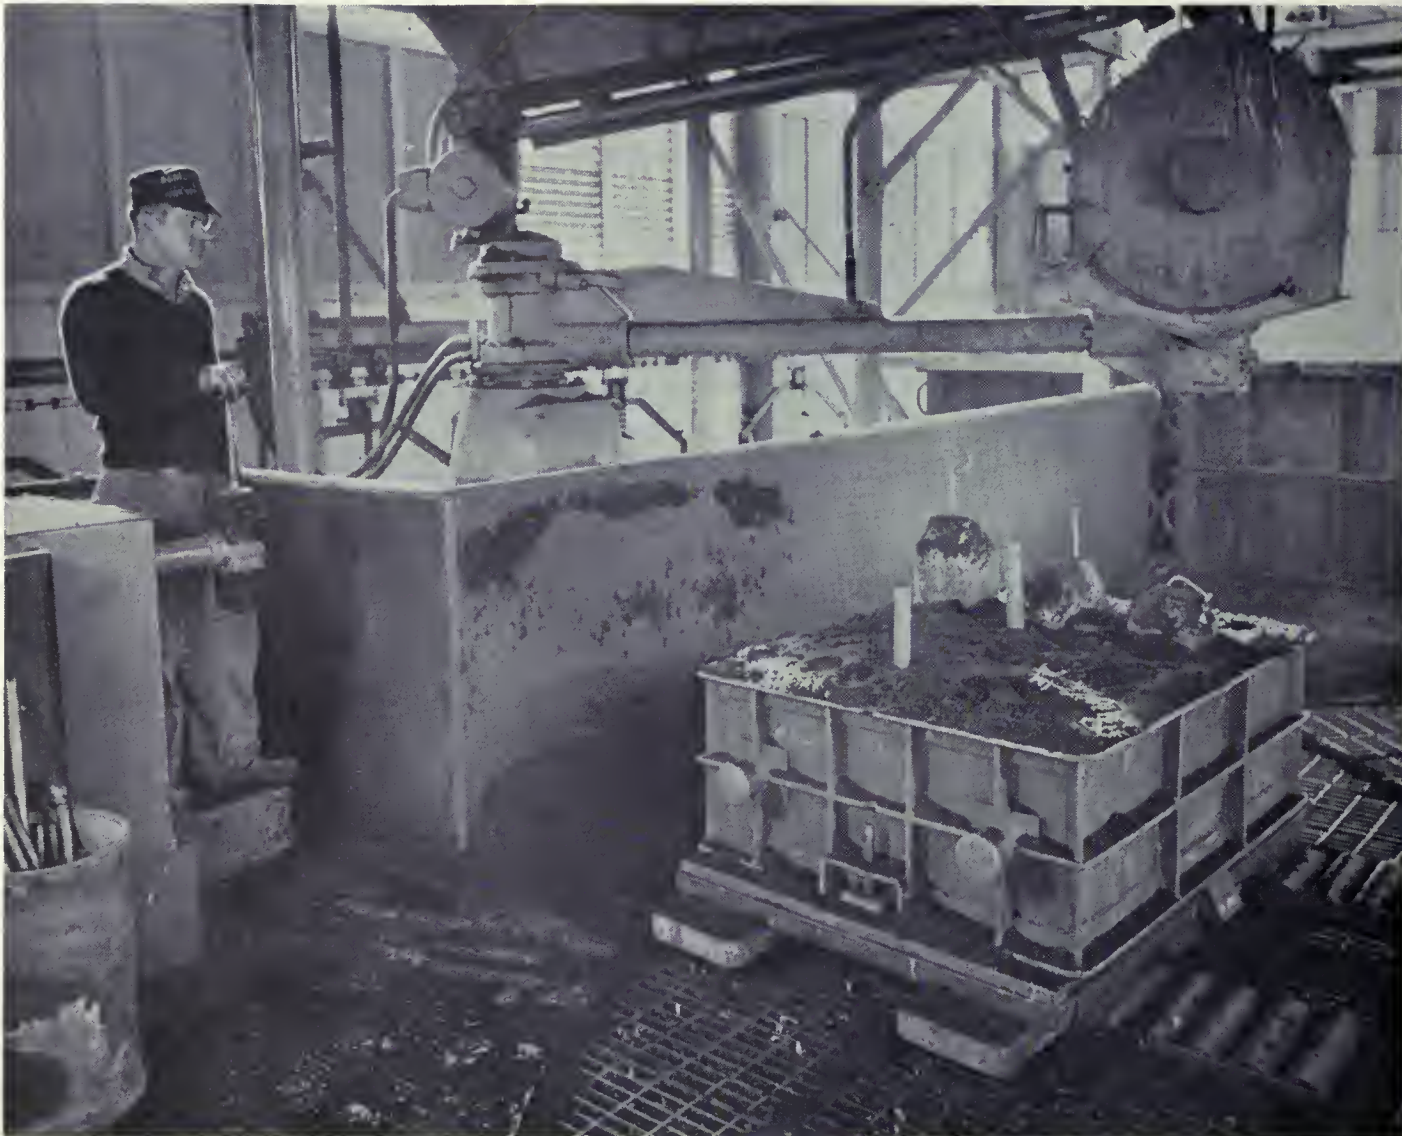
A. Preparing a light sand mold on a molding turntable at the General Metals Corporation Oakland foundry. Operator controls position of the delivery head (right) of the sand-slinging machine as it distributes and rams sand in the mold. (Photo courtesy of General Metals Corporation).
